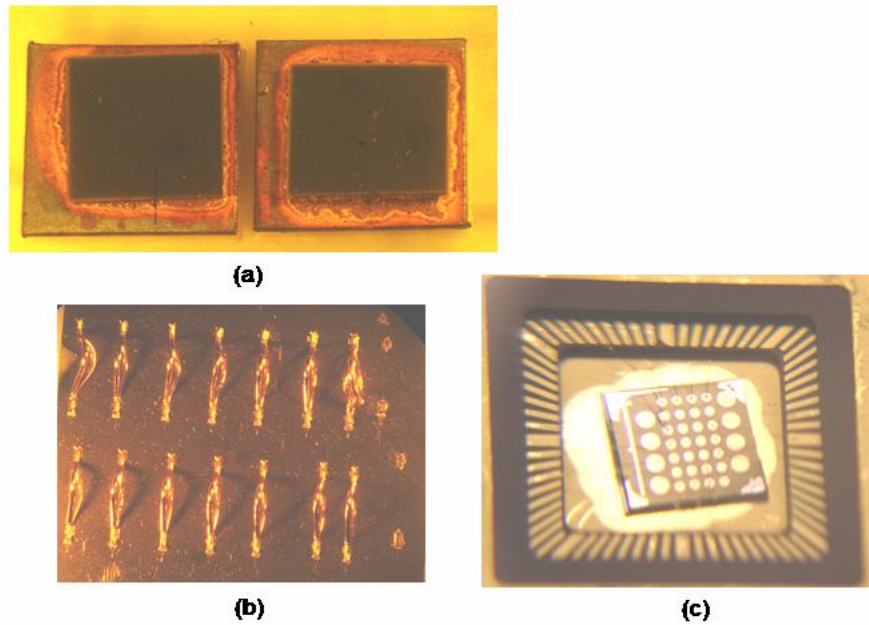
(a) Large area wire bonded sample for pull and bond shear testing (b) Chip brazed sample for die shear testing
